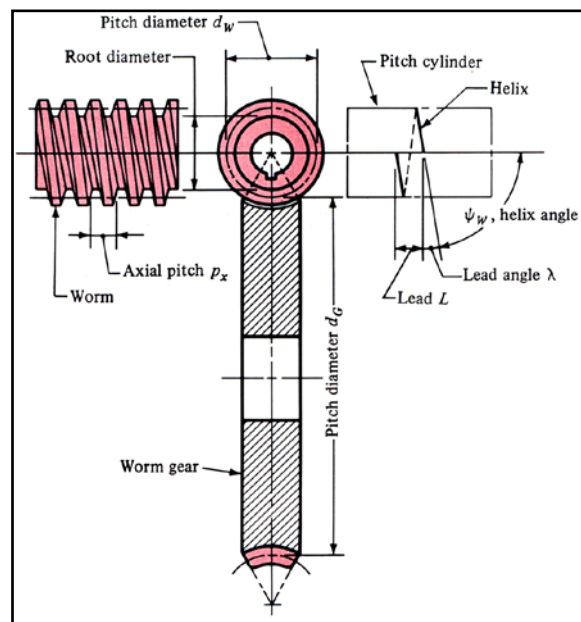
Worm gear drive nomenclature, single-throat example (graphics courtesy of Gleason)
